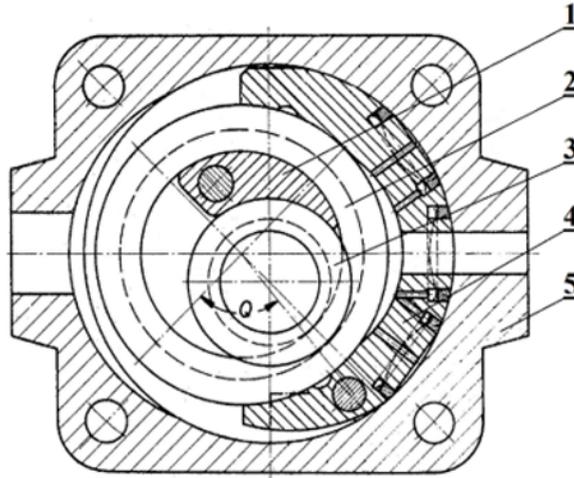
Gear pump with internal meshing with compensation of radial clearances according to the patent no. US3525581 [6] by Otto Eckerle from 1968: 1 - sickle insert, 2 - toothed rim, 3 - toothed wheel, 4- piston mechanically compensating radial clearances 5- pump housing.
